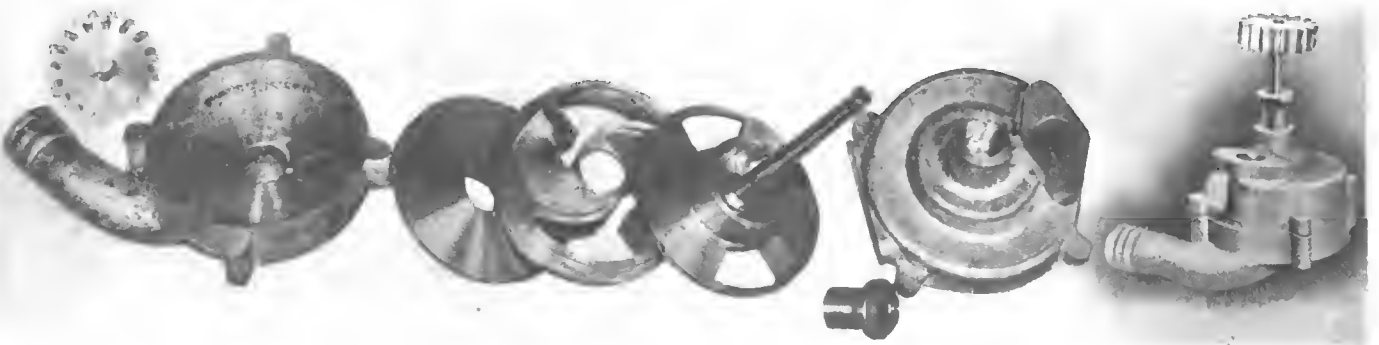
Detailed parts and complete assembly of a form of centrifugal pump.
